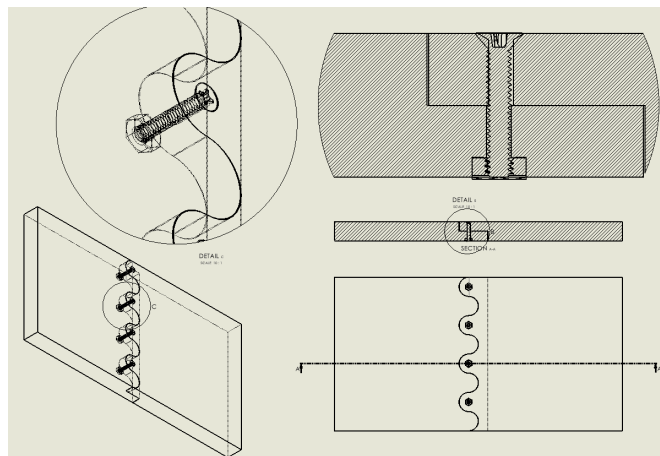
Wireframe drawings of simplified Interlocking seam design between forefoot and heel including cross sections for the insets for the screws and nuts.
